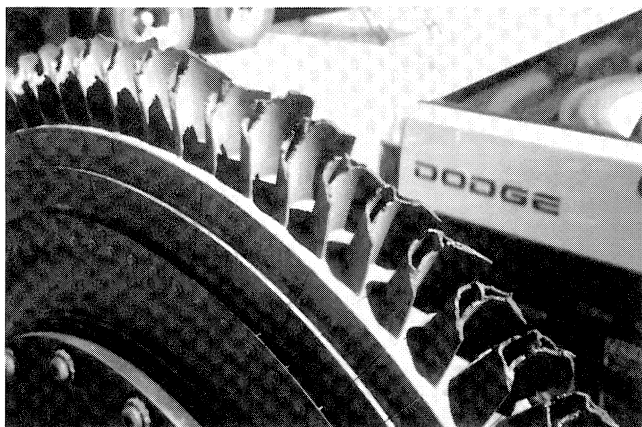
Damage to Hollow-Cored First Stage Turbine Buckets in a Mechanical Drive Gas Turbine.
